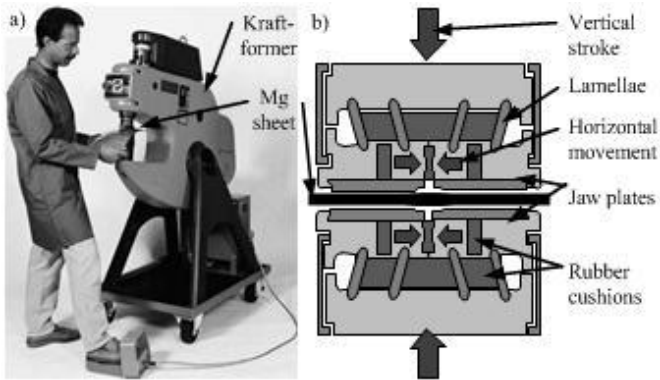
a) Eckold Kraftformer KF 30 Piccolo driving machine; b) schematic representation of the mechanism inside the shrinking tool set (Scherer et al., 2007; Eckold AG, 2010)
